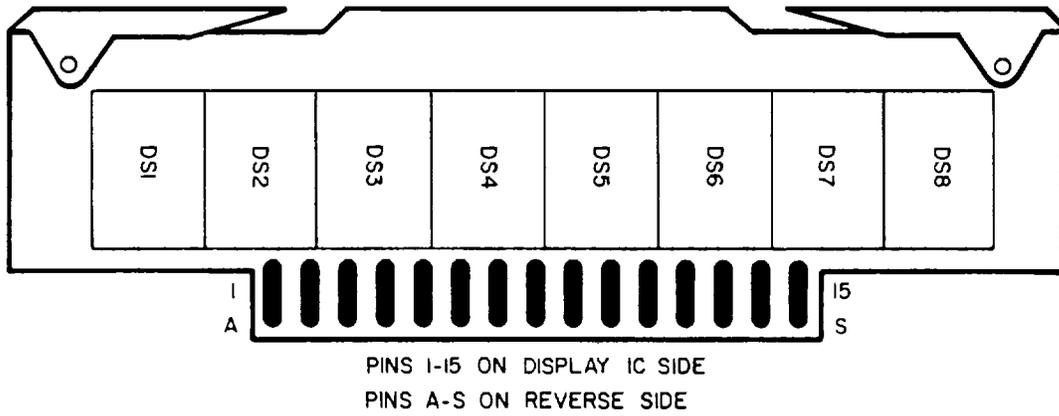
B. A1A2, Counter Display Board Assembly, Components (CHANGE 9)
